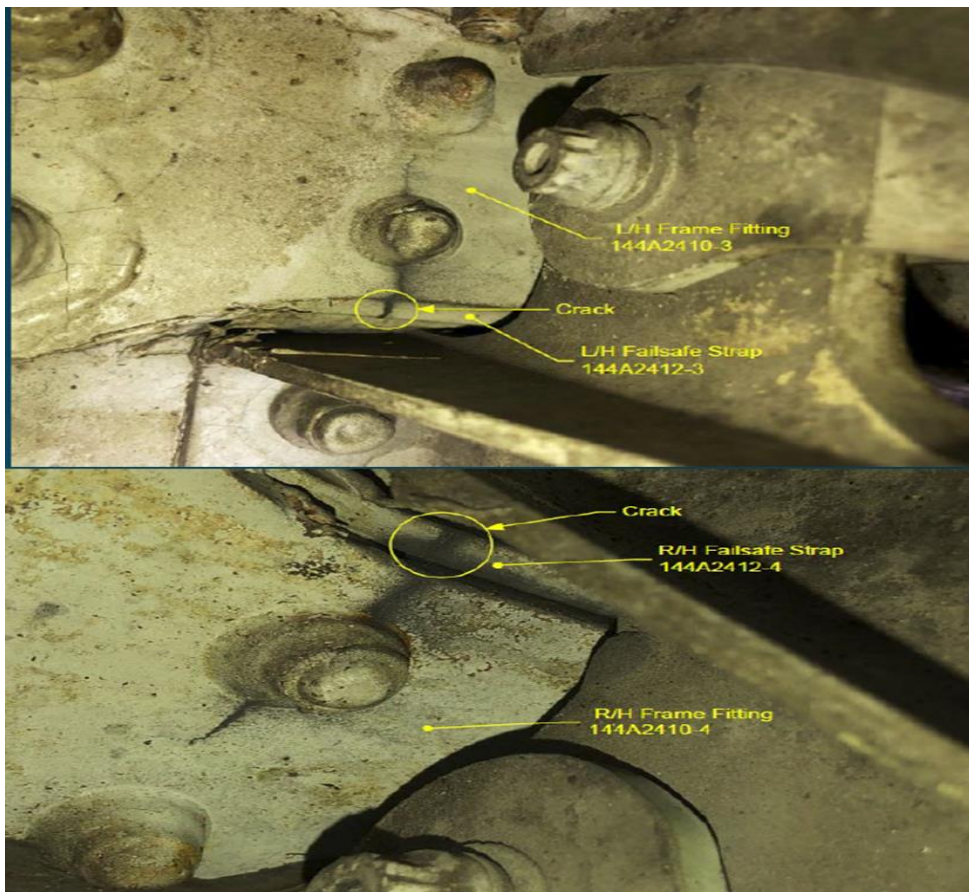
Example showing fitting/strap with cracks (Boeing Multi Operator Message MOM-MOM-19-0536-01B).
